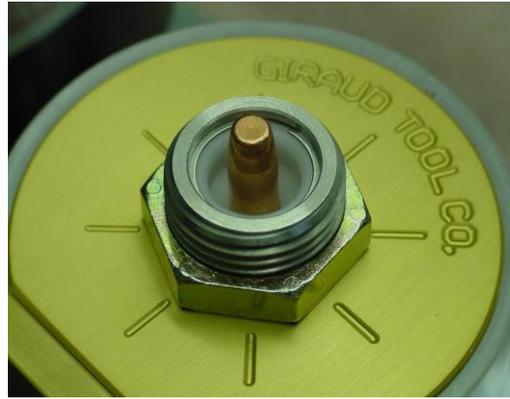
Meplat projectile holder with projectile inserted into trimmer body.
